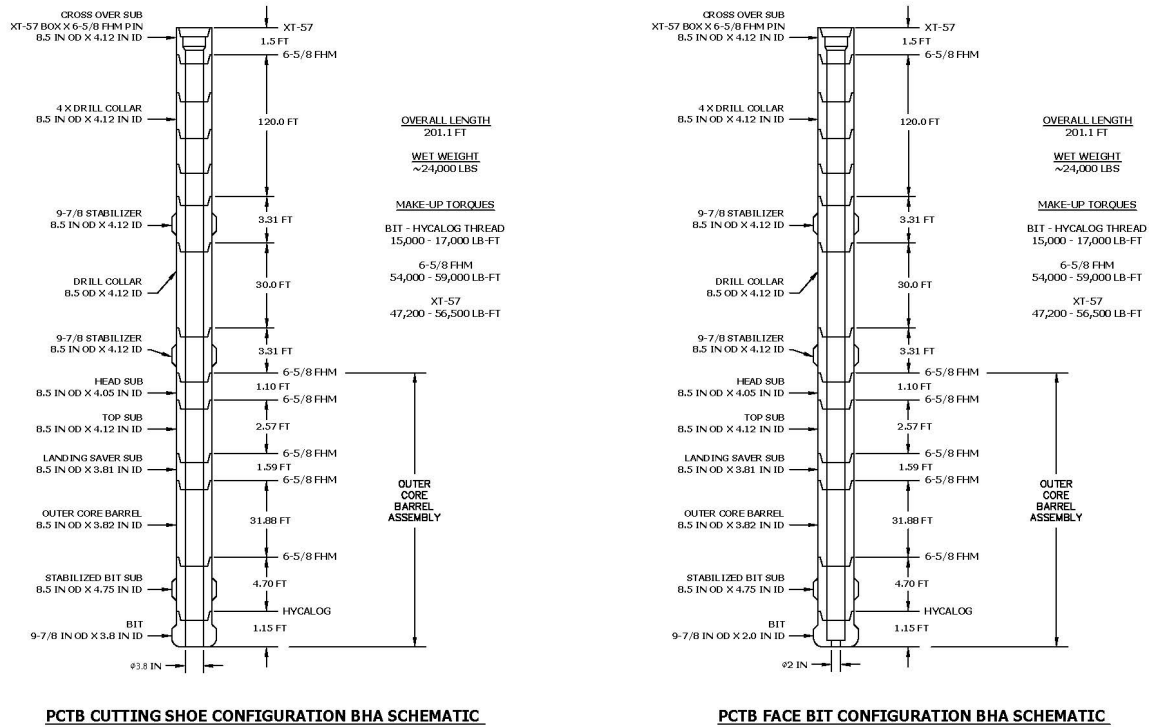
Drilling/Coring Bottom Hole Assemblies Configurations (Flemings et al., 2018).
